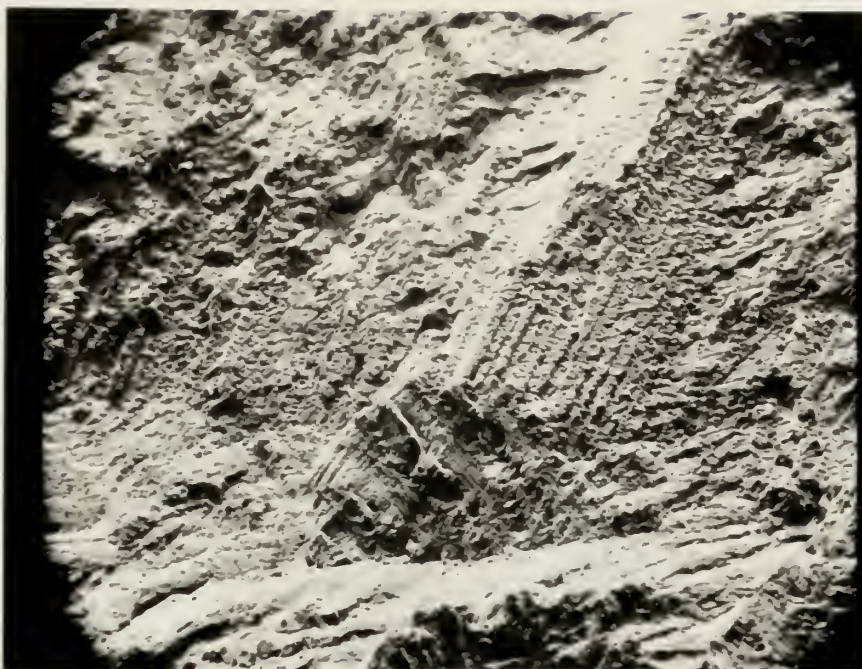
Inconel 625 weld metal fatigue fracture surface. 123X.
